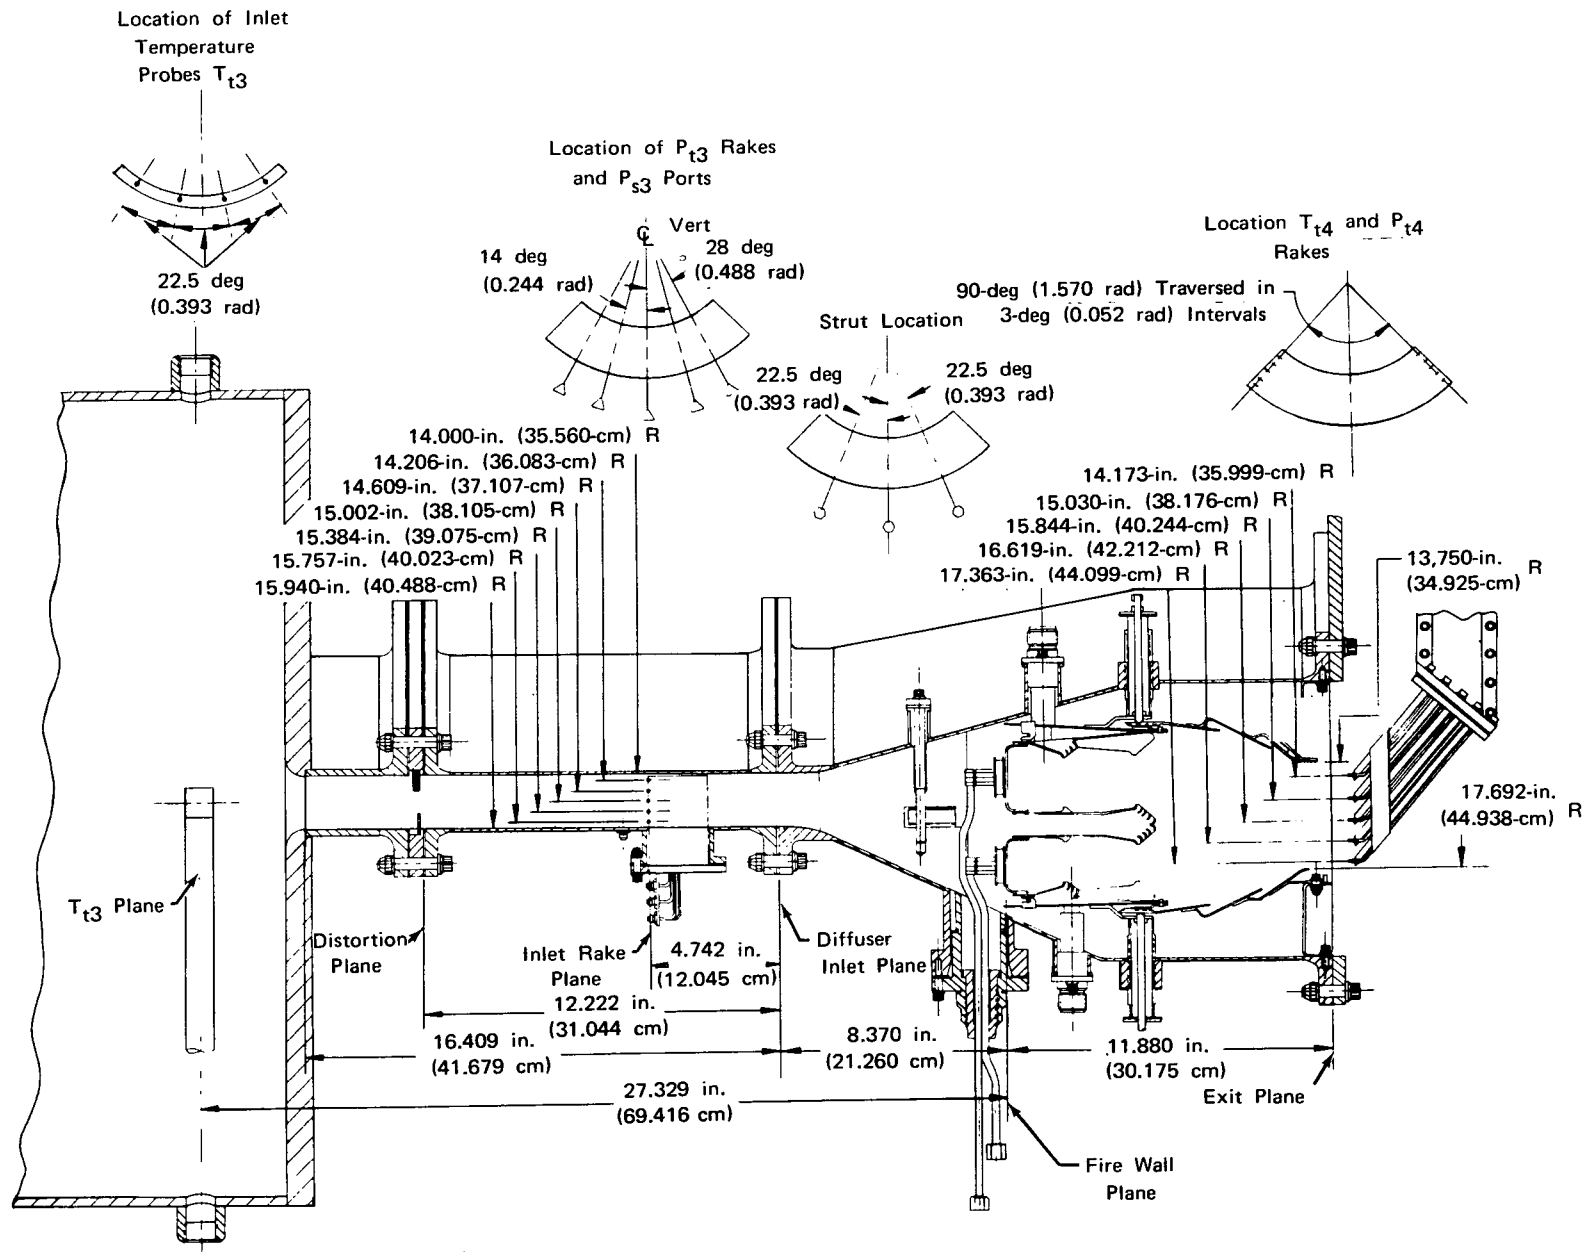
Test Rig Cross Section Showing Basic Performance Instrumentation Planes, Shown Without Exhaust Ducting or Gas Sample Rakes
